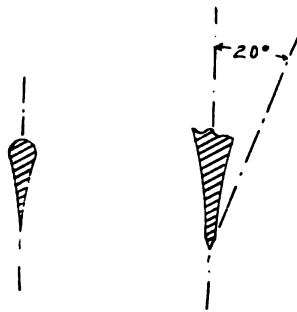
Cross section of a scalpel blade the sides of which are slightly concave. The surfaces come so close together that near the edge they are parallel and terminate in a cutting edge as shown at the right, enlarged.
